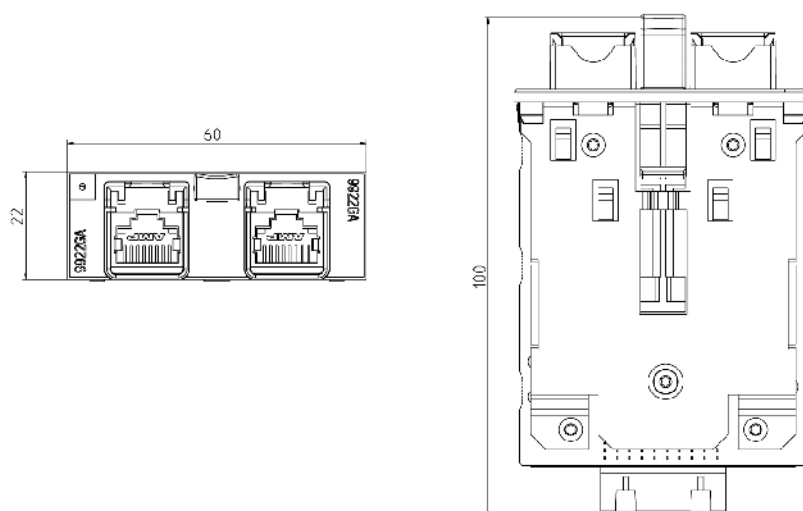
MM900 dimension drawing 1: Electrical RJ-45 ports with securing collar
